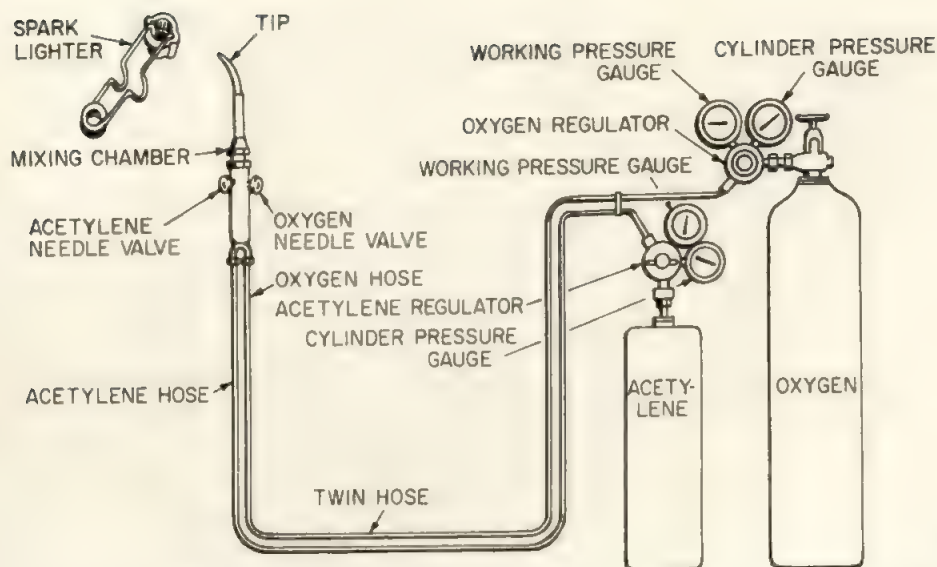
Apparatus required for welding with OAC.
